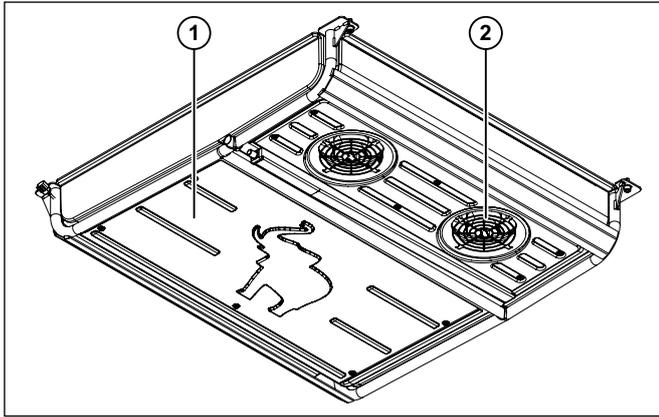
View of the roof auxiliary evaporator for the MultiTemp. design (2 and 3 chambers)
